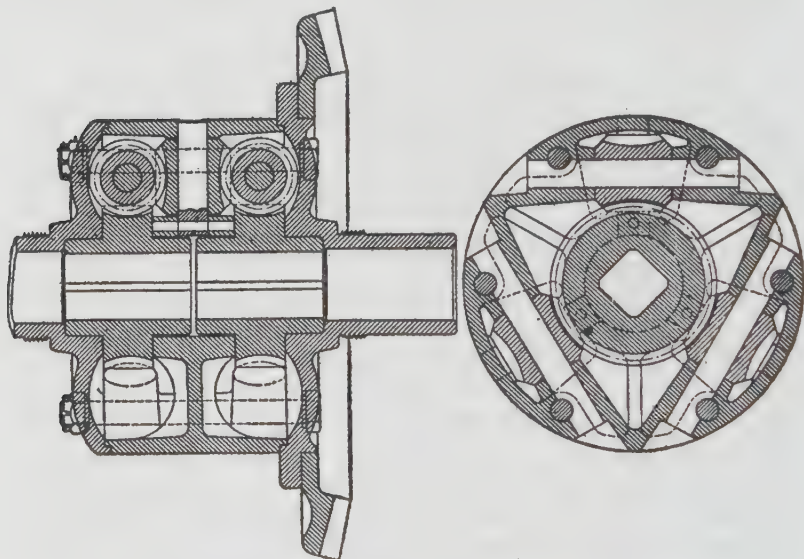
M & S HELICAL DIFFERENTIAL GEAR.
